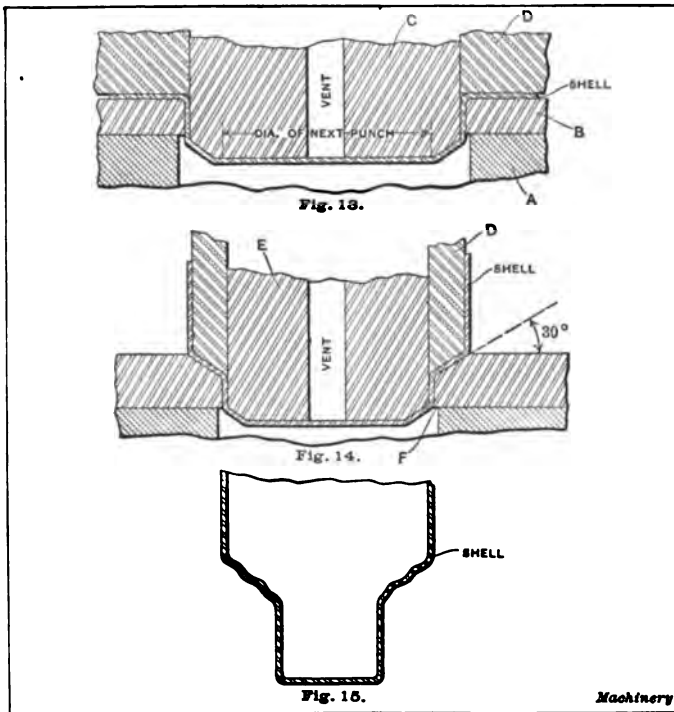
First Drawing Die. Fig. 14. Redrawing Die. Fig. 15. Shape of the Shell after Reducing the Shoulder
